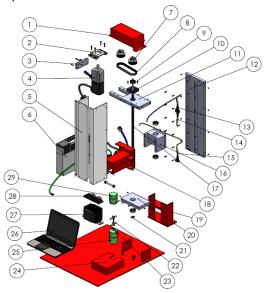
Design Part of the tensile testing machine. (1). Pulley cover (2). Motor holder, (3). Retaining Plate, (4). Servo motor, (5). Body cover, (6) Controller, (7). Pulley, (8) .Belt, (9). Bearing, (10). Bearing cover, (11). Top body, (12). Rear body, (13). Socket X21, (14) .Socket D002, (15). X20 socket, (16). Threaded drive shaft holder , (17). Threaded drive shaft, (18). Top grip holder, (19). Rear guarde, (20). Botton body (21). Ring spi, (22) Specimen, (23). Specimen pin, (24). Botton grip holder (25). Botton grip, (26). Computer, (27). Transformer, (28). Terminal, (29). Top grip.
